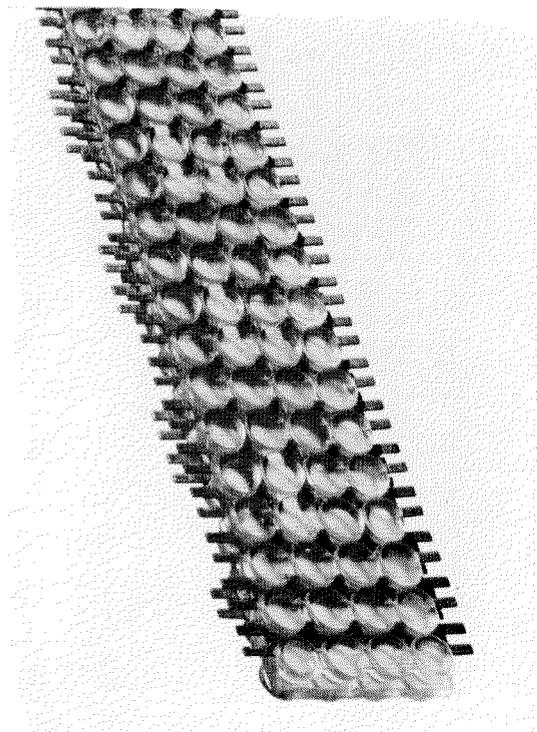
The cylindrical projections are ironed down to hold the grids in place. The outer edges of the metal strips are then cut away, producing the forked soldering tags to which components may be attached.
